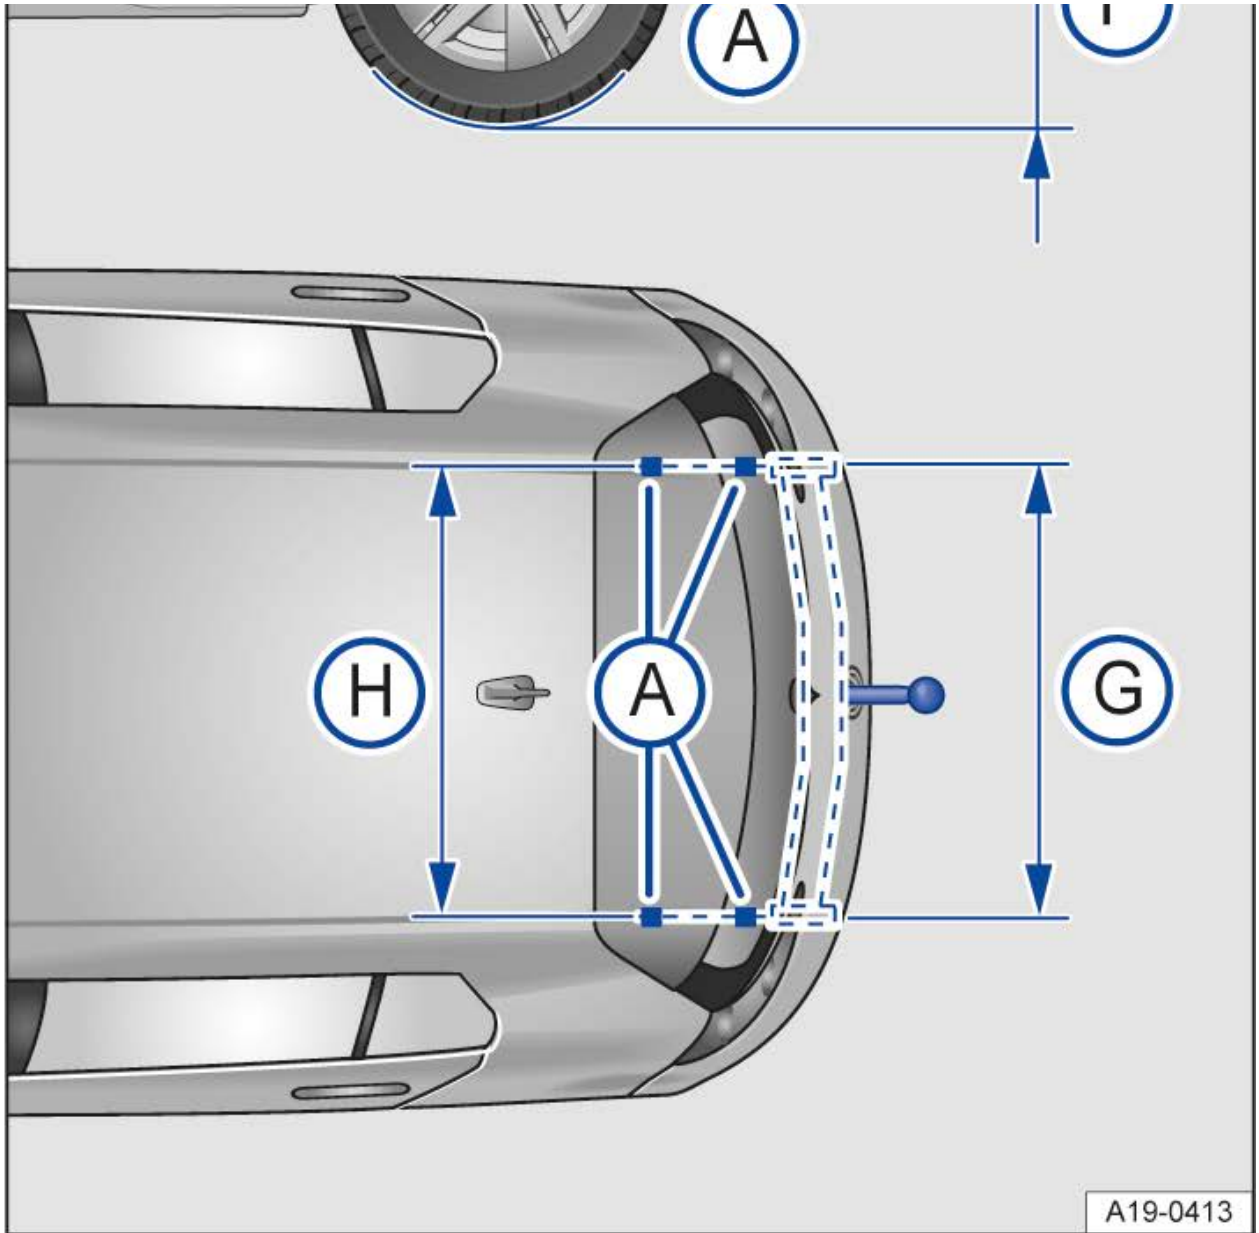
Dimensions and mounting points for retrofitting a trailer hitch.
